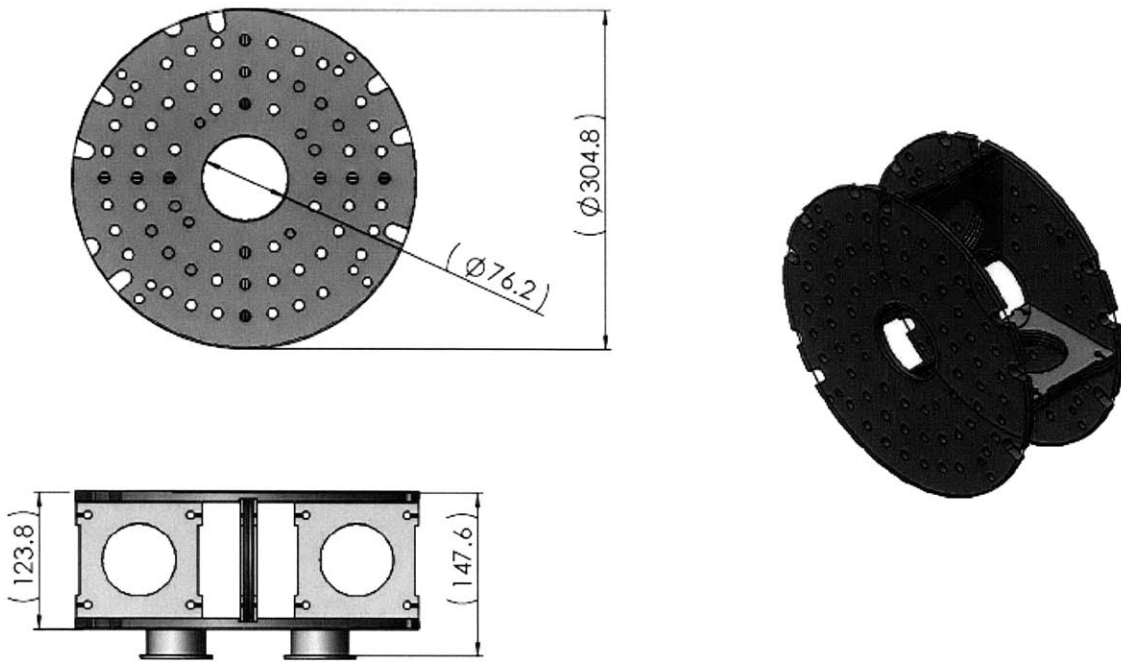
Multi-view drawings of the DFI design. Dimensions are in mm.
